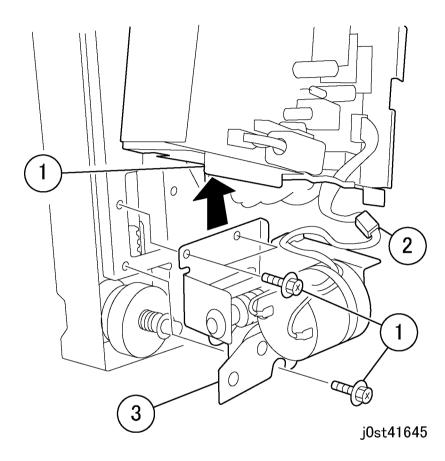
Removing the Staple Motor Assembly (j0st41645)
